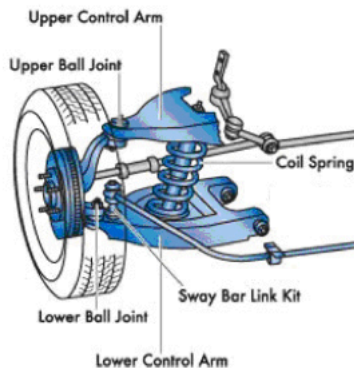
Rear wheel drive cars typically have both an upper and lower ball joint on the driving tires, while front wheel drive cars only have one ball joint at each driving tire. The human body has a ball and socket joint at both the hip and the shoulder.
